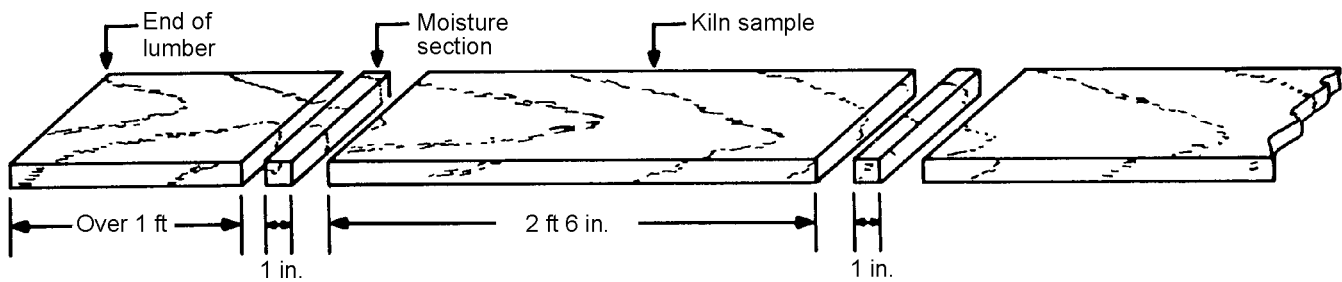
Method of cutting and numbering kiln samples and MC sections. 1 in. = 25 mm; 1 ft = 0.3 m.
